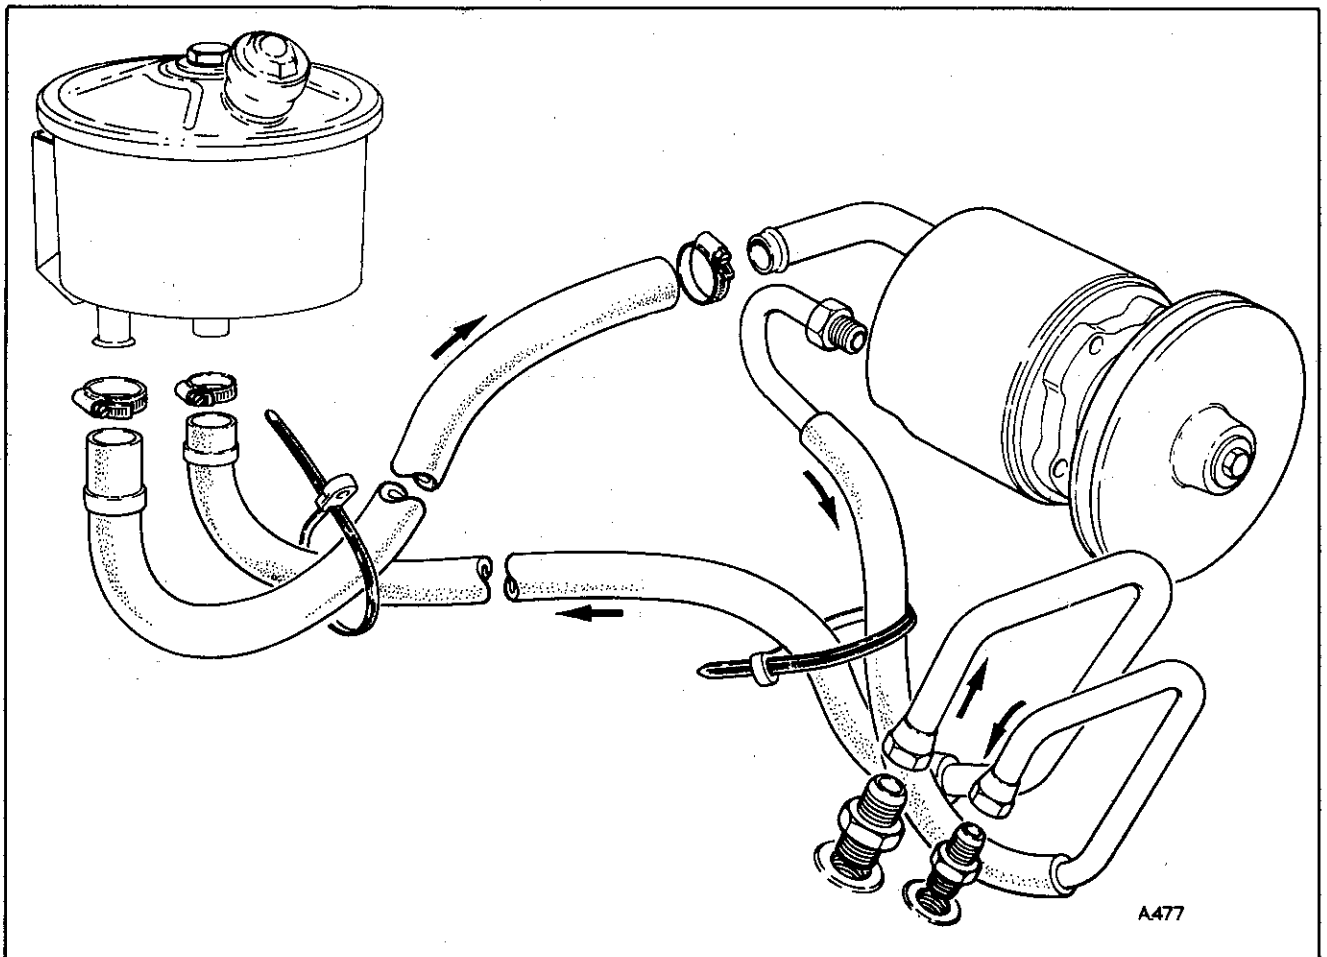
Layout of Pipework (except RB75 with 6.247 engine)
